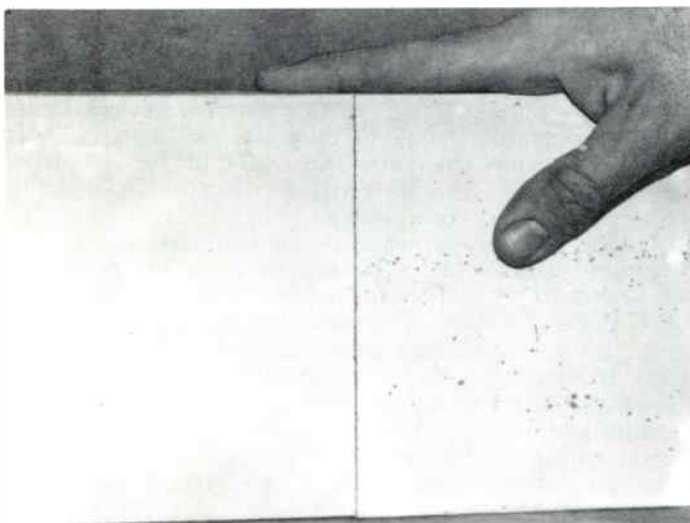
(b) After cutting the board, join the two sections together to test the straightness of the board and table top. There should be no gaps.
